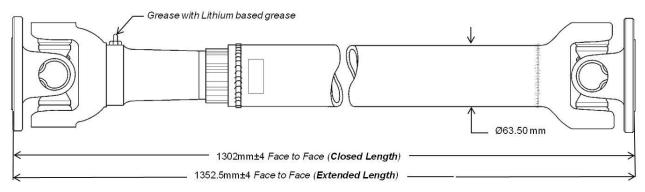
6x6 Gearbox to Intermediate Axle Prop Shaft – NIIN 66-128-5662 / LRA PNo: AYG7331
